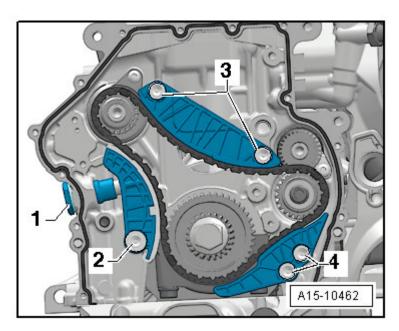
Balance Shaft Timing Chain, Tensioning Rail And Guide Rails
